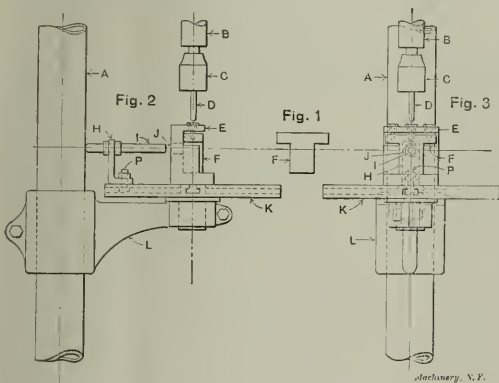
Forging to be Drilled. Fig. 2 and 3. Front and Side of Drill Press with Knock-out Attached.
